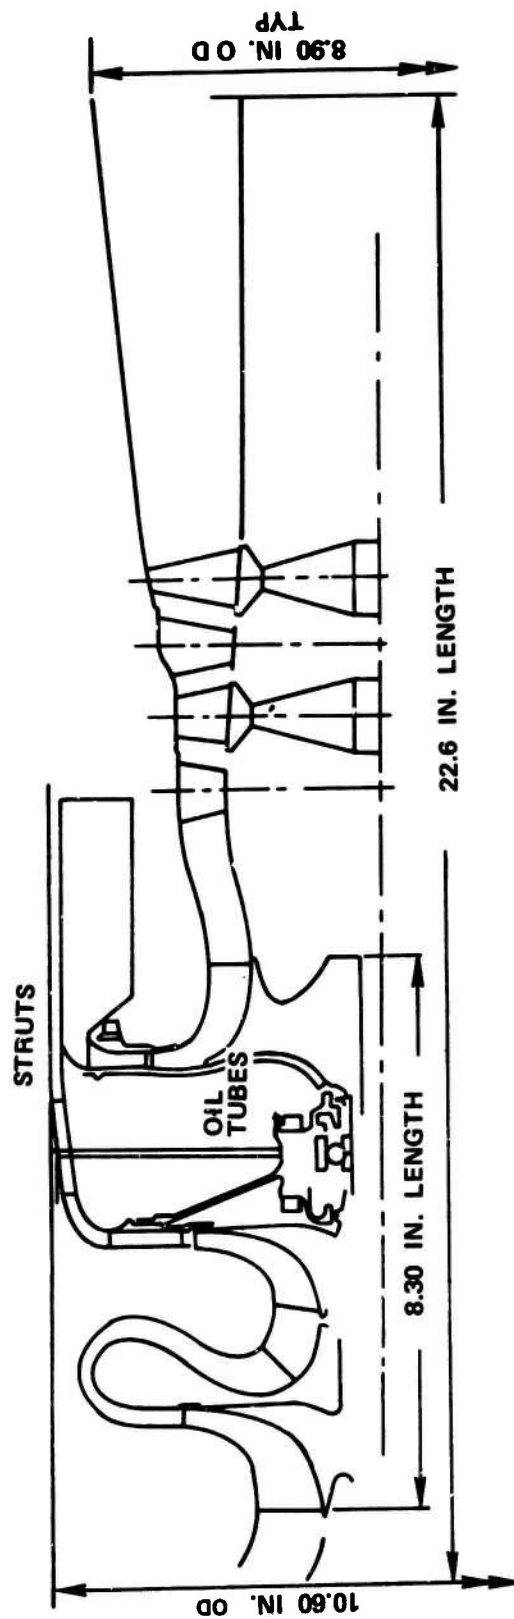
Turboshaft Engine Schematic With Two-Stage Centrifugal Compressor, Reverse Annular Combustor, and Radial Turbine.
